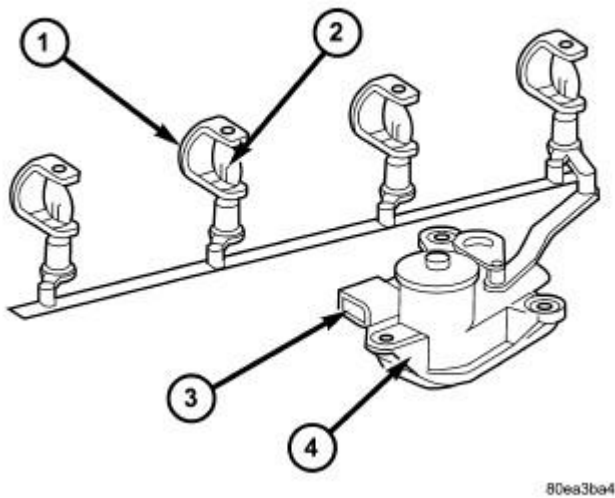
INTAKE MANIFOLD SWIRL VALVE COMPONENTS
